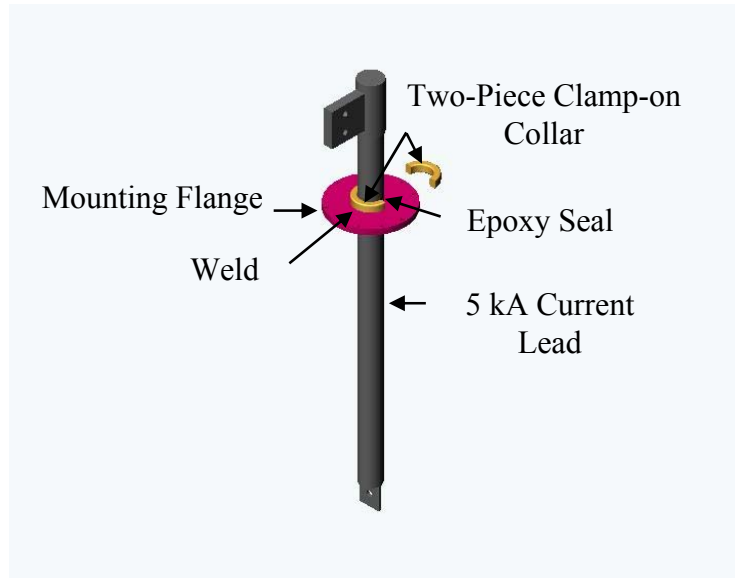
Method of mounting a flange to the 5 kA current leads without welding directly to the leads.
